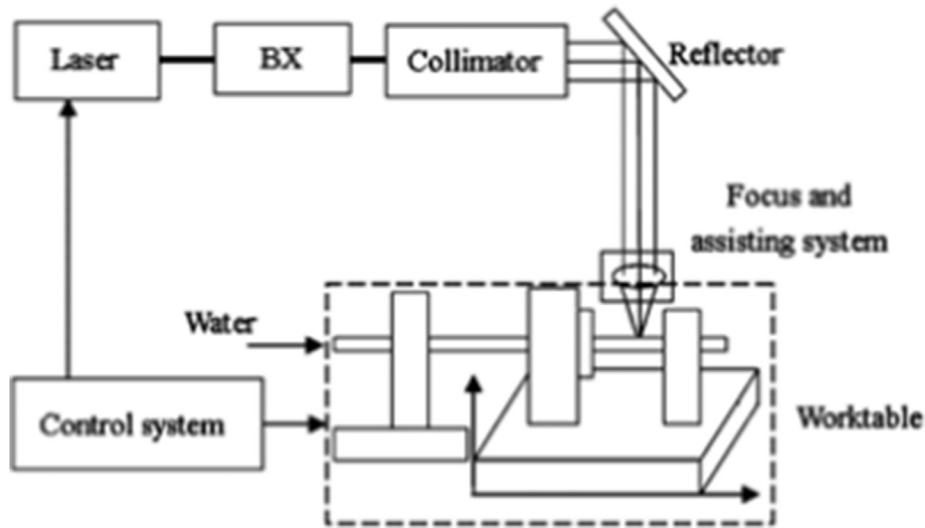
Schematic of the laser cutting system used to fabricate a stent from a tube [36].
